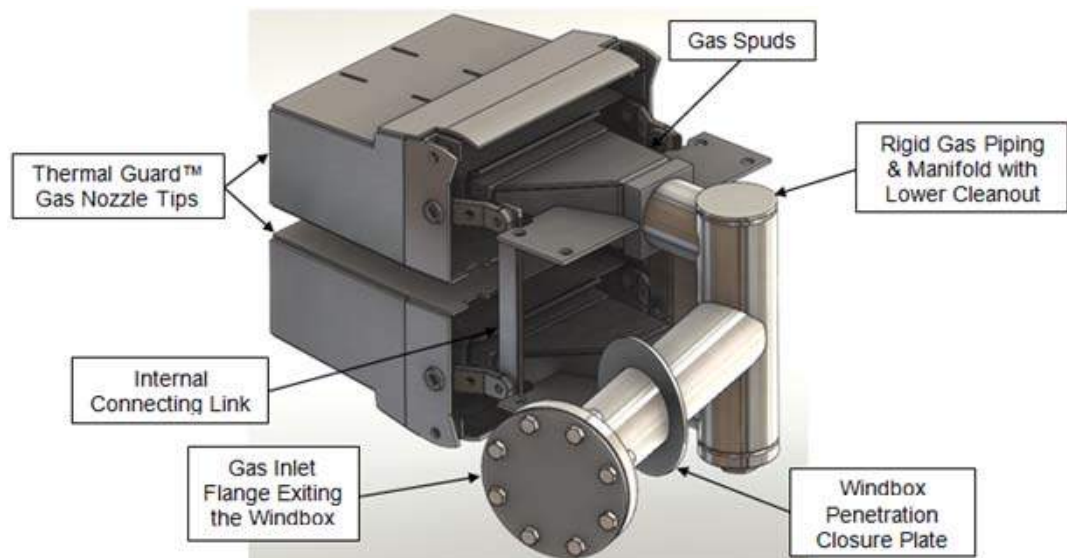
Typical fixed two (2) gas spud arrangement with manifold assembly shown with two (2) tilting gas nozzle tips – similar to proposed equipment for Unit 2 (R-V's Thermal Gurad™ Series I design)
